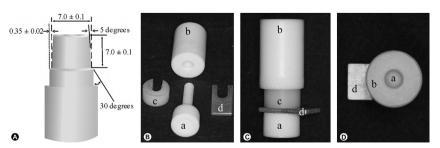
A: Dimensions (mm) of stainless steel die. B: Plastic custom mold with the Parts a, b, c, and d separated. C: Mold with Parts a, b, c, and d positioned for making the specimens: side view. D: Mold with Parts a, b, c, and d positioned for making the specimens: top view.
